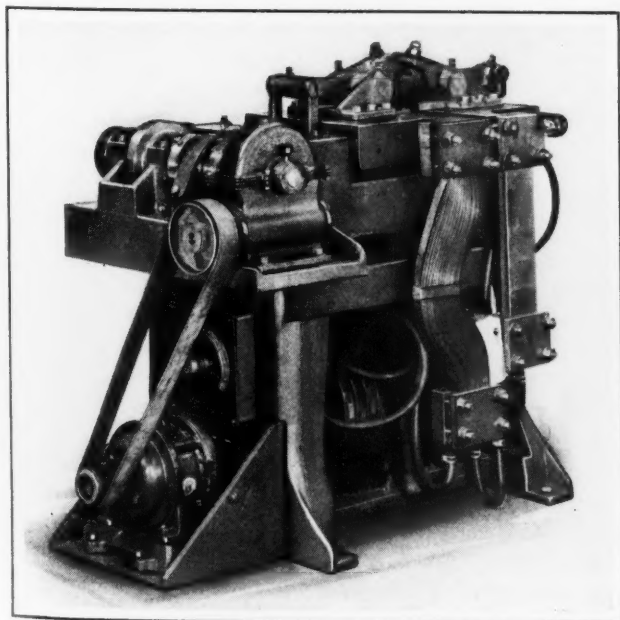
Thomson Butt-welder for Tee and Miter Welds
